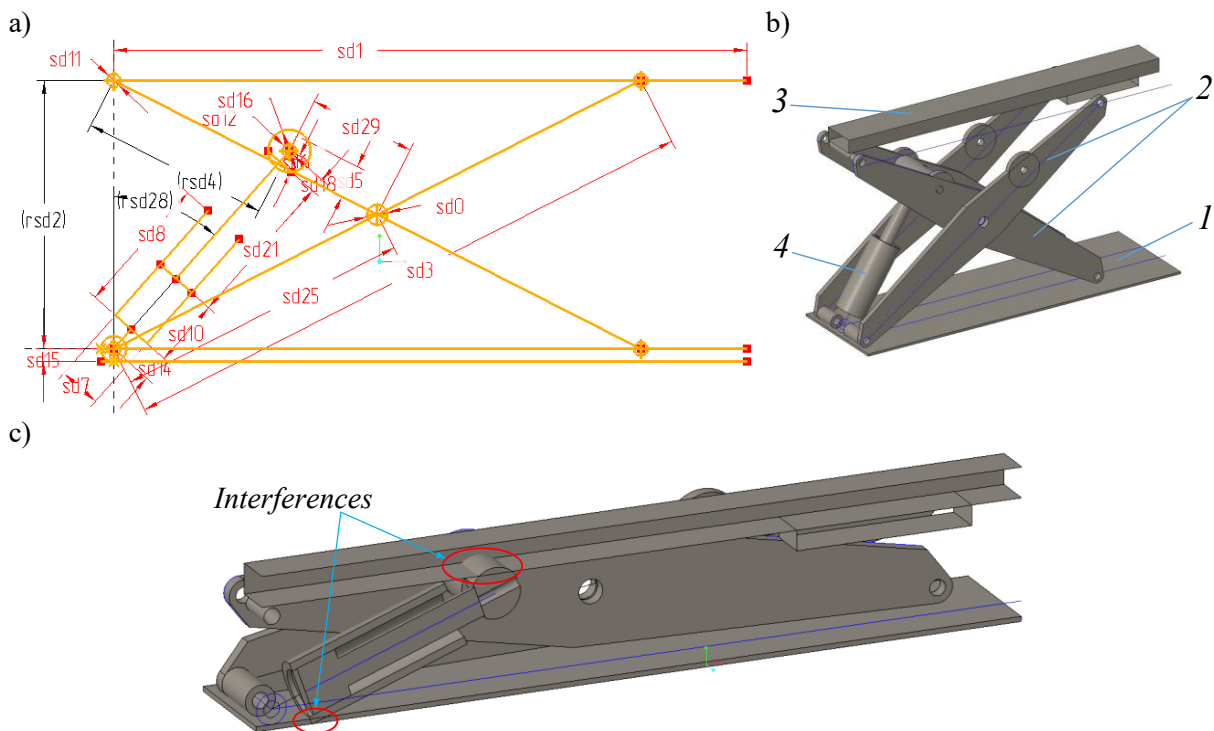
Skeleton geometry of the scissor rolling bridge jack: a – quantitatively defined structure; 1 – base weldment; 2 – scissor assembly; 3 – extension arm tube assembly; 4 – cylinder assembly; b – skeleton geometry of the scissor rolling bridge jack; c – interference zones between components in the folded position
